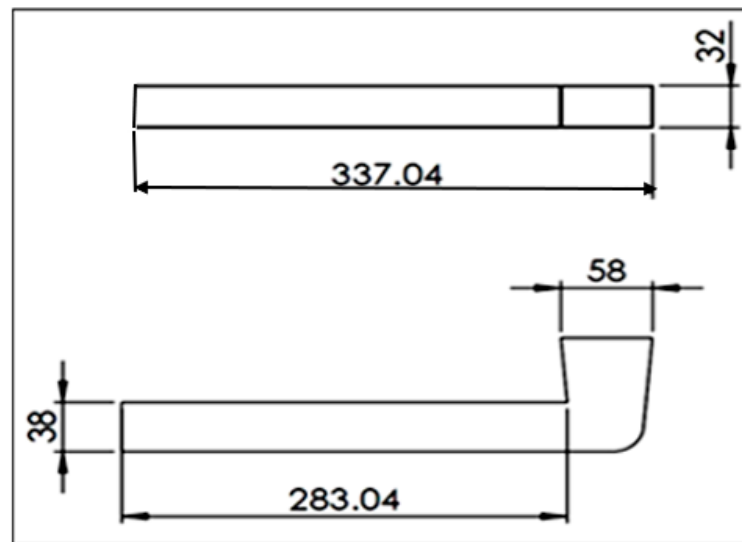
L-shape casting mold (all dimensions are in mm; solidification rate was ~ 3 °C/s).
